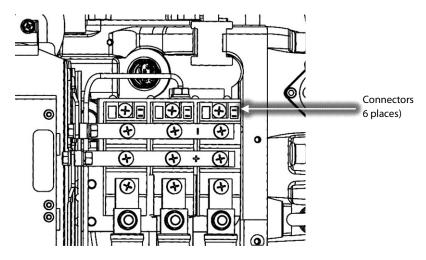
Soft Start SCR Gate Cable Harness Removal
